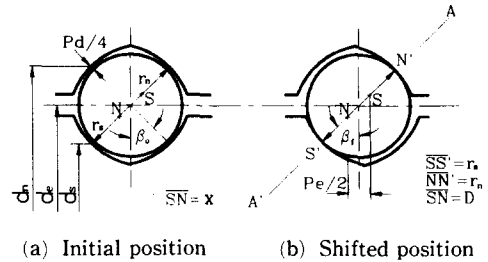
Cross section of a ball screw, showing ball race contact due to axial shift of shaft and nut
